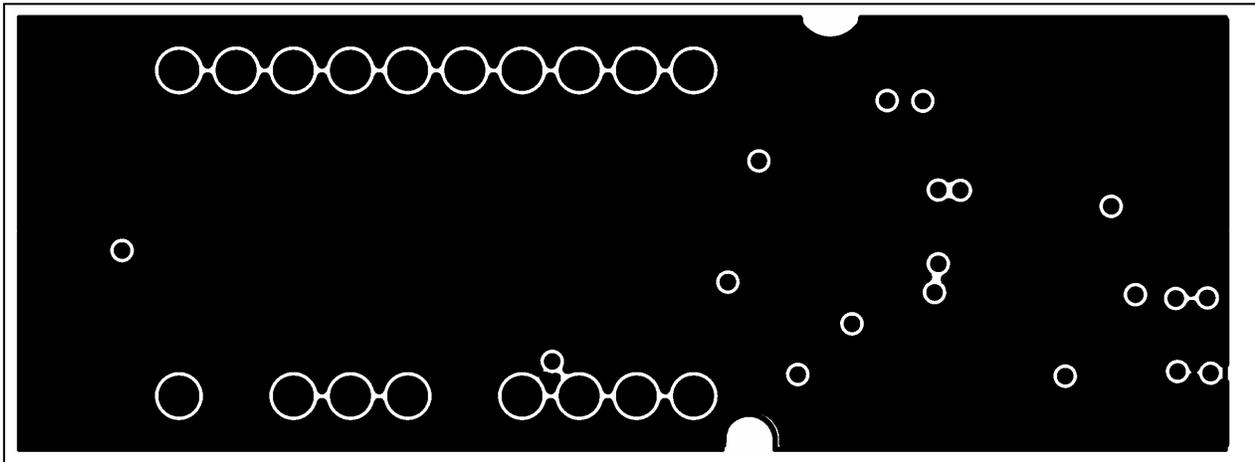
HFRD-2.0A PC Board Layout – Ground Plane
